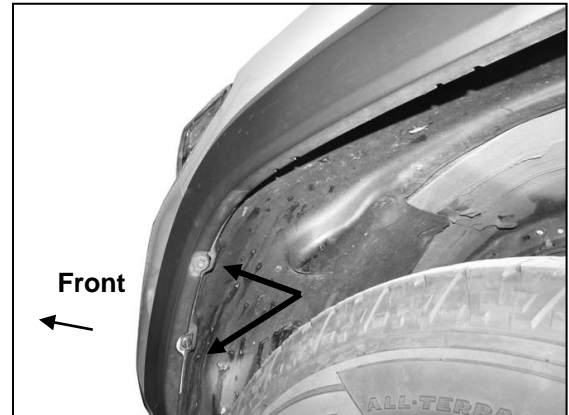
Remove hardware attaching bottom of bumper to vehicle (arrows)
